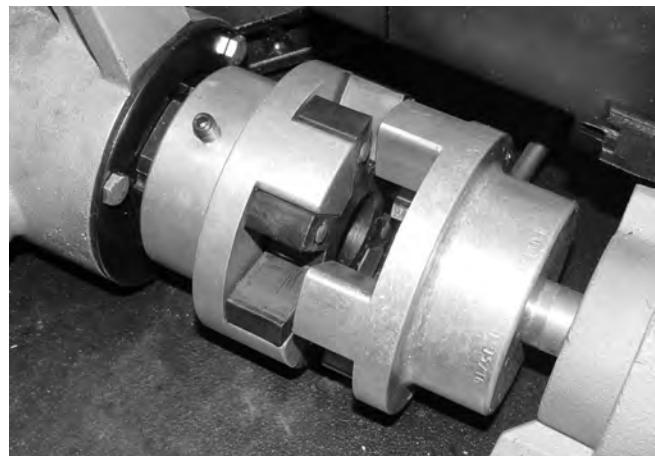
Removing Bearing, Retaining Nut and Front Half of Coupling
